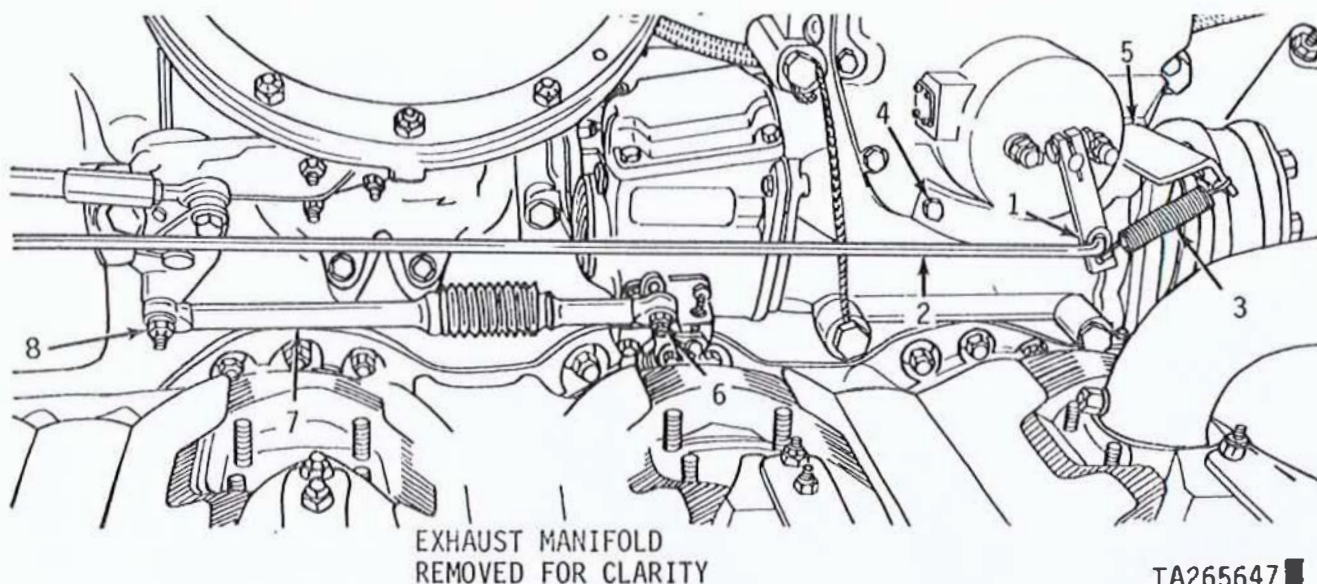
Disconnecting or connecting manual fuel shut-off rod, throttle control rod, and spring angle bracket, model AVDS-1790-2C and AVDS-1790-2D engines.
